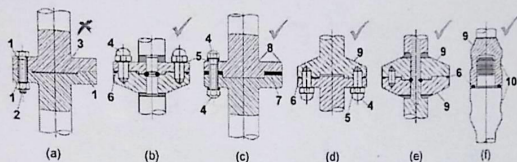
(a) Bolted agitator couplings with flat hexagon head screws without elastomer gasket under the bolt head and the nut give rise to metal-to-metal crevices (1) that may allow the ingress of food product and bacteria. Moreover, debris may lodge in and around the bolt thread (2). The absence of a circumferential O-ring or flat gasket gives rise to another metal-to-metal crevice, and product and microorganisms may be retained in the cavity (3). (b, c) Agitator couplings made by means of domed hexagon bolt heads and nuts (4) provided with an elastomer gasket (5) under the bolt head and the nut allow for a crevice-free joint without metal-to-metal contact. Due to the presence of a circumferential O-ring (6) or flat gasket (7), no product or microorganisms can enter inside the agitator coupling. Corners are radiused (8). However, there is still a horizontal flat surface at the upper side of the agitator coupling where debris may lodge. (d, e) Aseptic applications require for fastening hardware at the bottom side of the agitator coupling, and the upper parts of the coupling should be sloped to a minimum of 15–45° (9) to prevent debris from collecting at these places and to allow for maximum drainability. (f) The most optimal agitator coupling in an aseptic environment is a threaded shaft connection with a O-rings or flat gasket (preference for the first mentioned) (6) to seal the mating surfaces to avoid exposure of the interior thread. The corners of the spanner flats on the end cap have been radiused (10) (CFRCRA, 1997; Hauser et al., 2004b; ASME, 2009).
